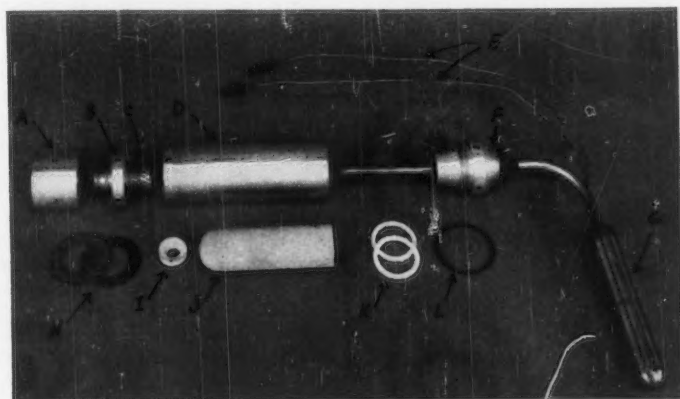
Exploded view of sampling head: A. Coupling, B. Lock nut, C. Thimble tightening sleeve, D. Body, E. Static pressure leads, F. Nose, G. Sampling nozzle, H. Hard asbestos lock nut gaskets, I. Teflon gasket, J. Alundum extraction thimble, K. Soft asbestos thimble gaskets, L. Hard asbestos nose gasket.
